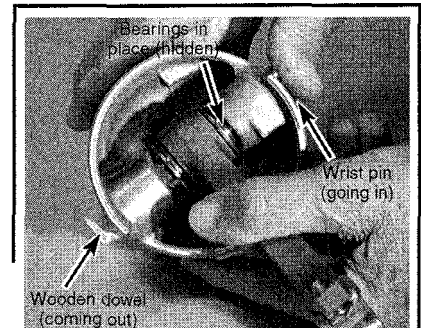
then install the wrist pin, displacing the installation tool and securing the bearing needles
